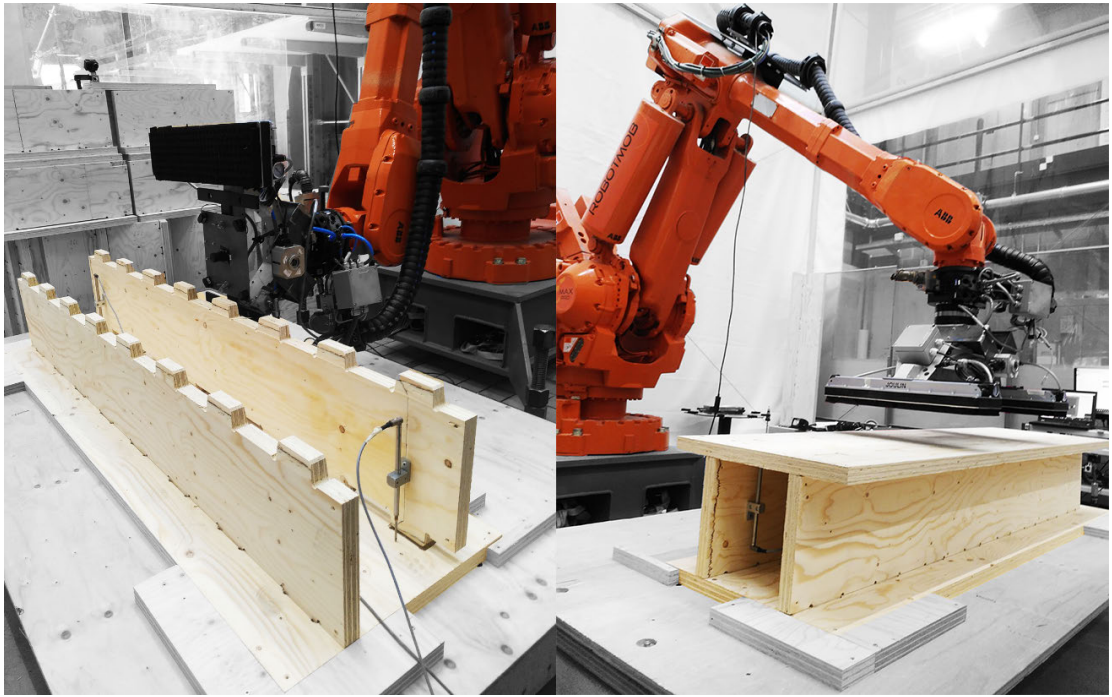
Robotic assembly of a box girder. The four plates are connected by eight through-tenon joints each.
